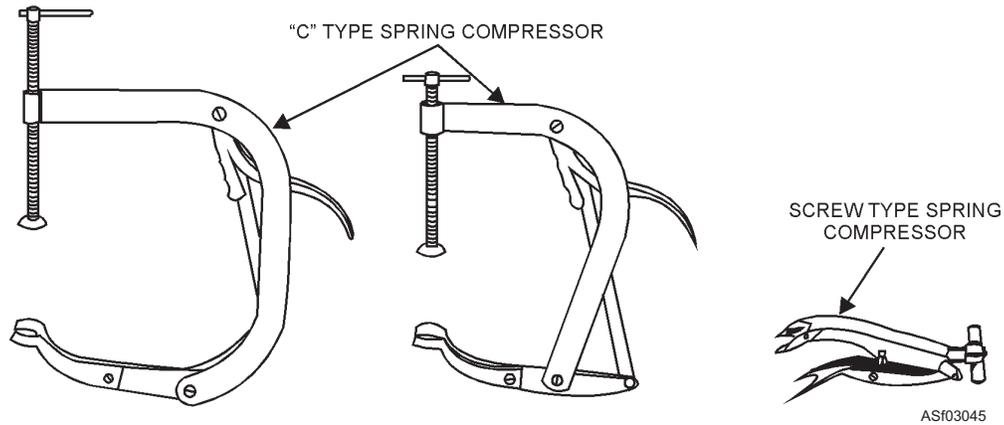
Valve spring compressors for L-head and valve-in-head engines.
